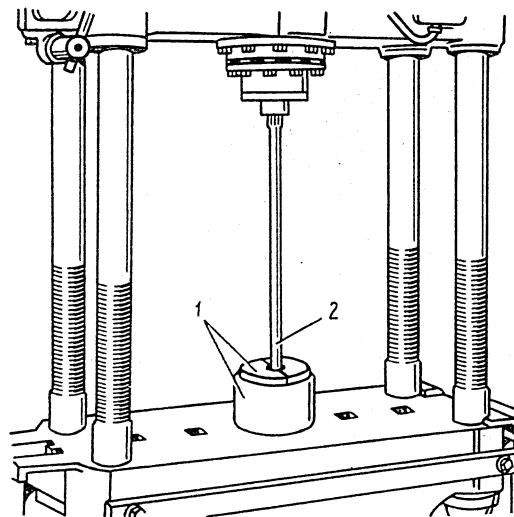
Removing the Axle Shaft Bearing Locking Ring:
